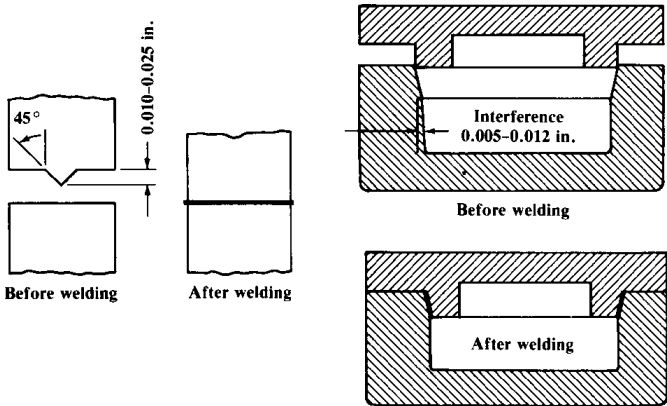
(left) Energy Director Types of Ultrasonic Weld Joint Designs for Assembly of Plastics Moldings, and (right) Typical Shear Interference
